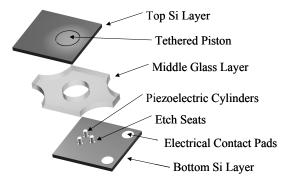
Exploded view of primary layers in singlelayer piston micro-actuator structure (top and bottom support glass layers not shown).
